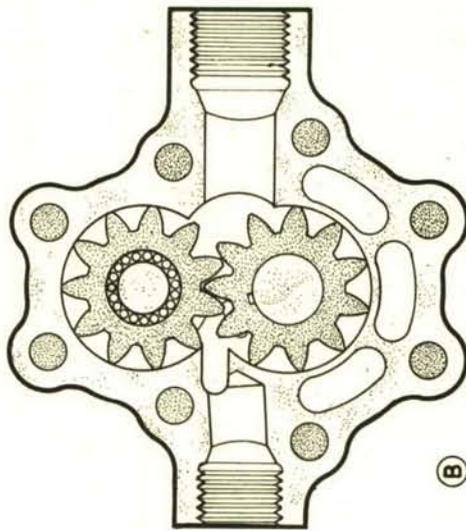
MEDIUM PRESSURE GEAR PUMP
